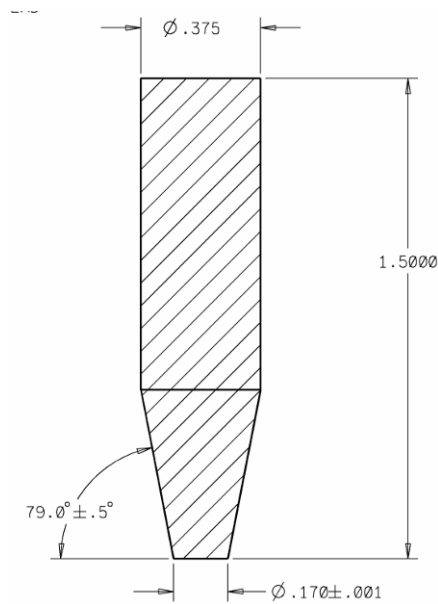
This Form Tool Was Used to Bored the Bolt Holes Before LENS Depositing. Even this Steep Angle Gave Sufficient Surface for Adequate LENS Adhesion
